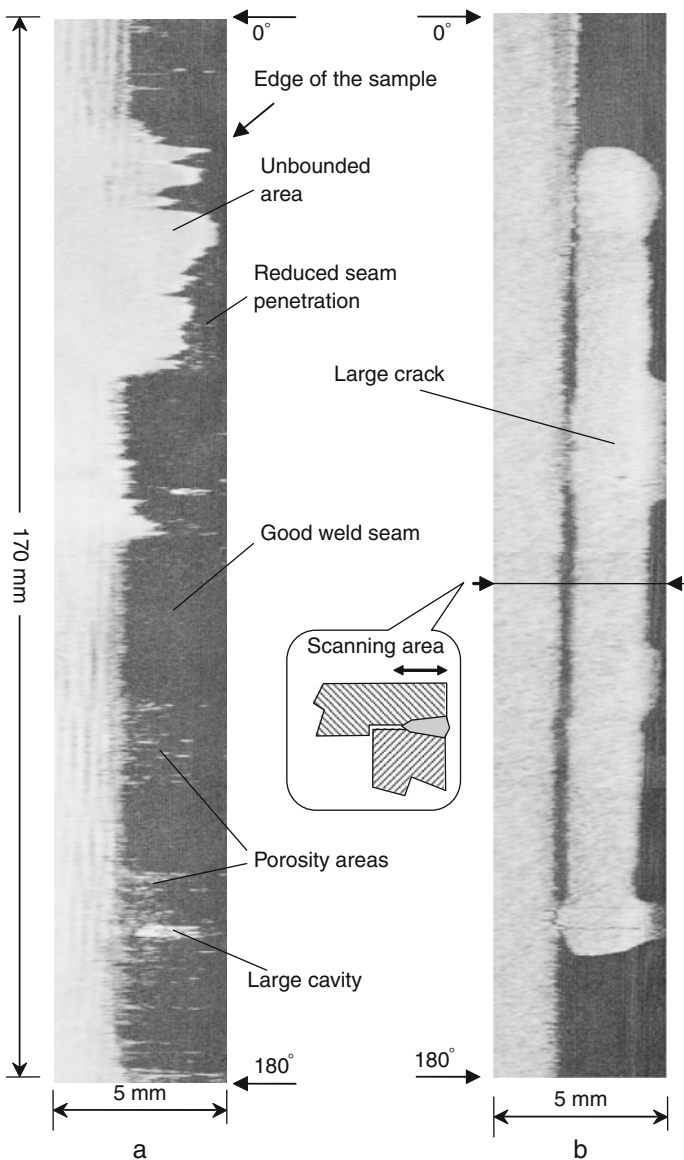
Cylindrical C-scans with welding defects (a) and crack (b)
